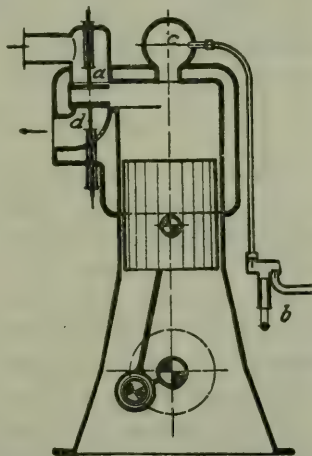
Explosion oil engine having a four-stroke cycle. *a*, air valve; *b*, fuel pump; *c*, hot bulb; *d*, exhaust valve.
